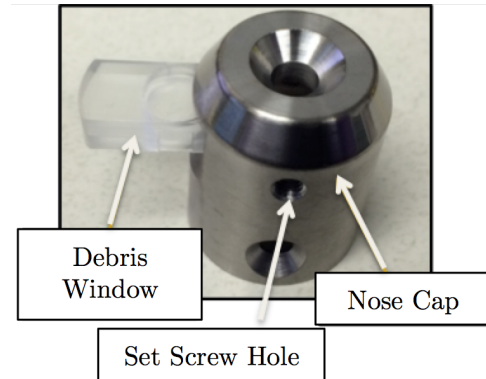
First build of the debris window assembly: polycarbonate slot concept with nose cap. The set screw hole shown will hold the debris window in place once it is fully installed.
